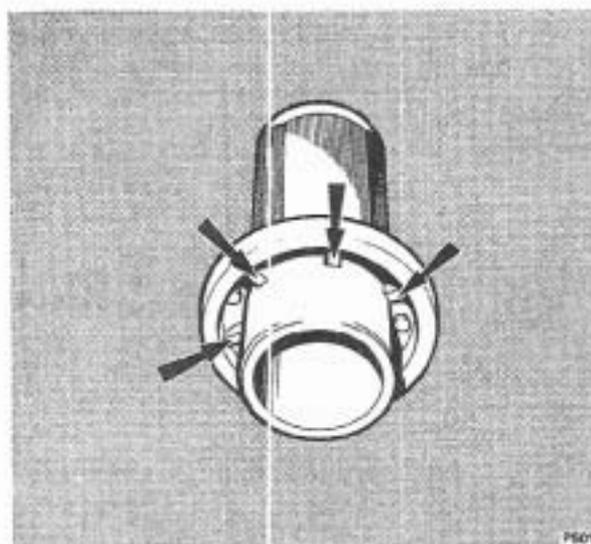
UNDER CUTTING WEBBING OF SEAL INSTALLATION TOOL RH 7953 (J-21359)
